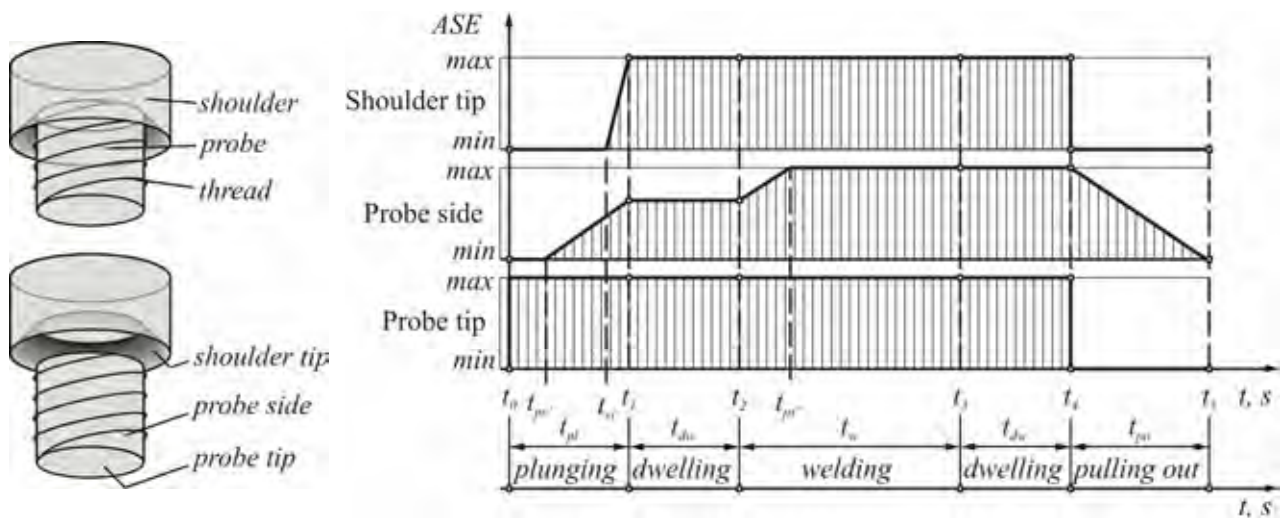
Active surfaces of the welding tool and active surface engagement (ASE) during FSW welding process
